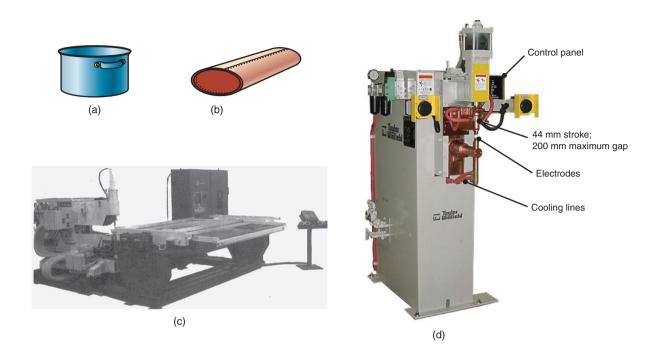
Spot-welded (a) cookware and (b) muffler. (c) An automated spot-welding machine. The welding tip can move in three principal directions. Sheets as large as 2.2×0.55 m can be accommodated in this machine with proper workpiece supports. (d) A typical spot welding machine. *Source:* (c) and (d) Courtesy of Taylor-Winfield Technologies, Inc.
